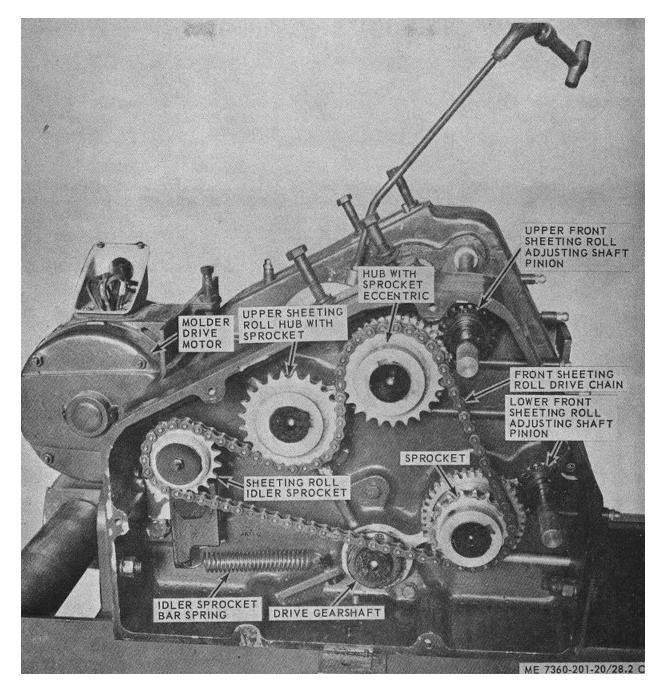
Molder headframe, right side Model 534-68. (ME 7360-201-20/28.2 C5)
